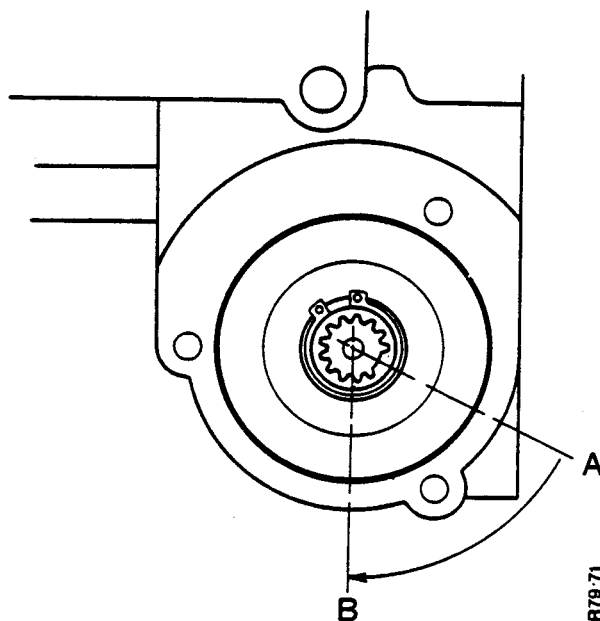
INSTALLING THE FUEL INJECTION PUMP QUILL SHAFT
